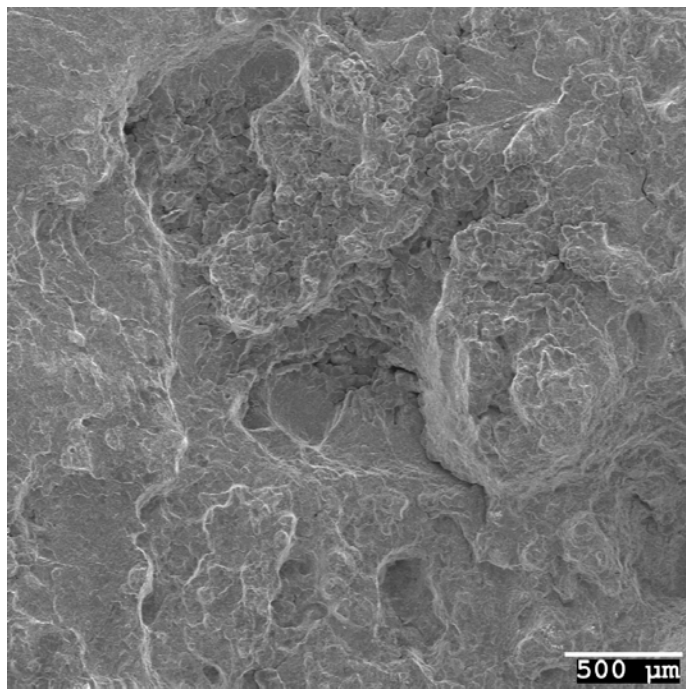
View of a Center Pore on Cylinder with Disc Specimen Fracture Surface, $S_a = 392$ MPa (Specimen E5)
